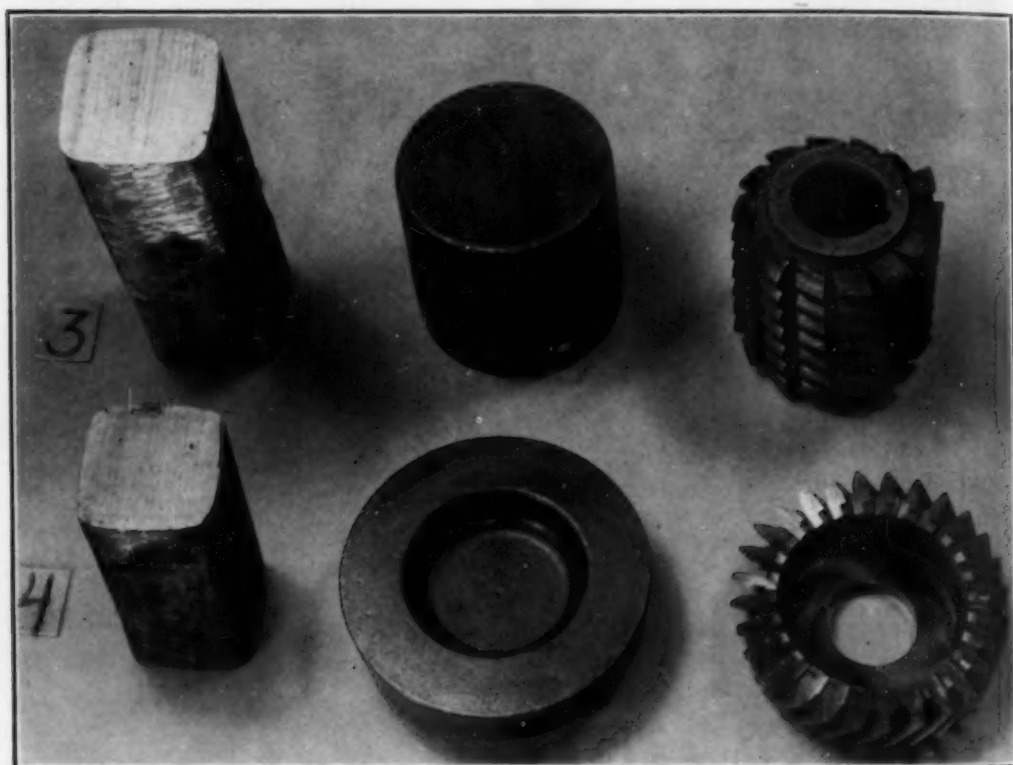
Billet Blank, Forging and Finished Tools. No. 3. 3x3-inch Hob, No. 4. Spiral Gear Shaper Cutter.
